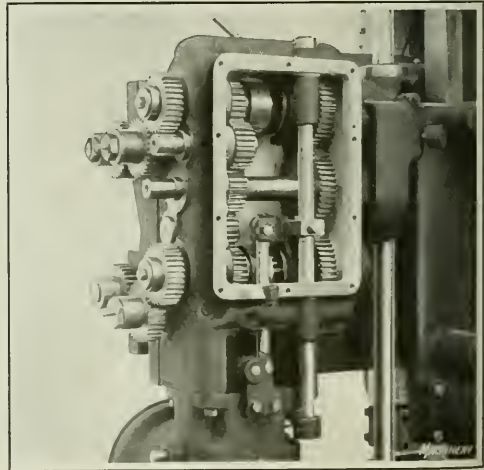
Feed-clutch Gear-box with Covers removed to show Change-gears and Studs for Threading Gears
